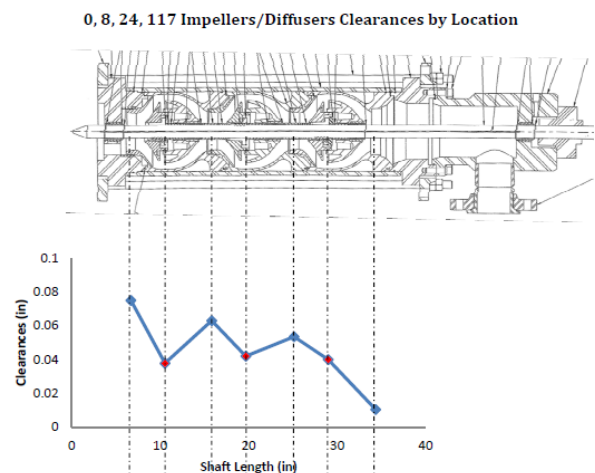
Impellers and Diffusers Clearances after 117 Hours by Location
